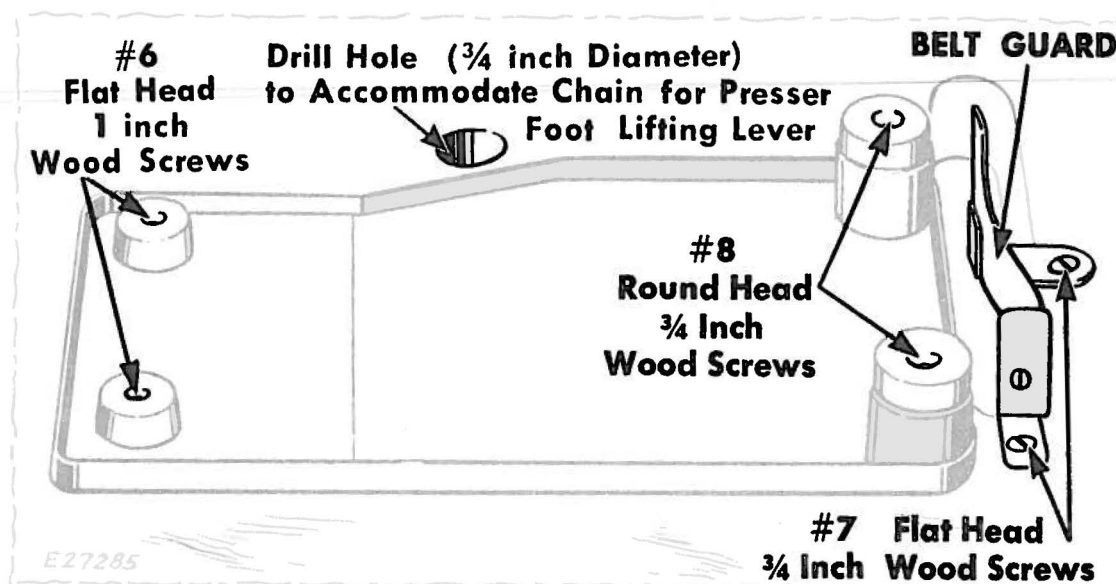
Machine Base on Table, Showing Position and Drill Sizes of Holes Required for Installation
